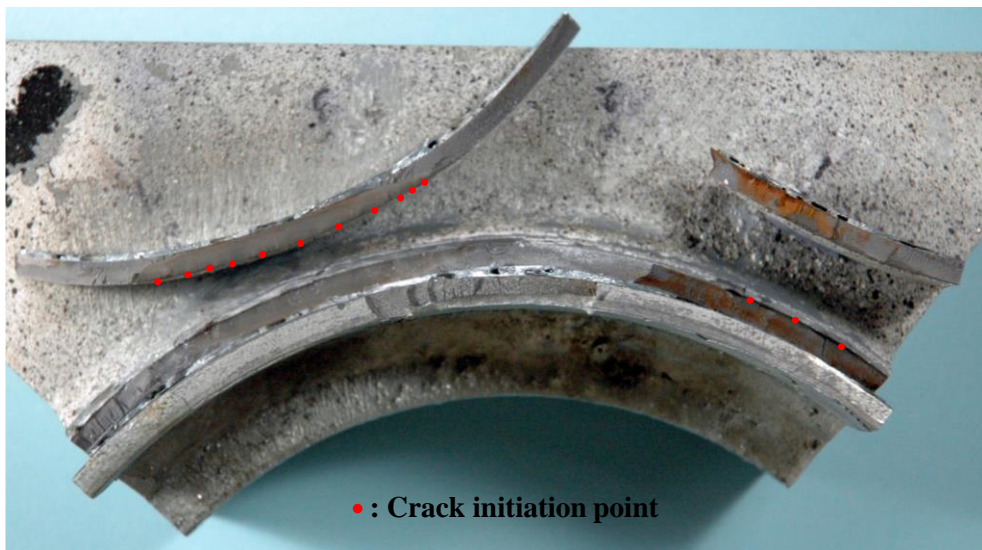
Fatigue fracture surface and identified crack initiation points in Type III-4 Arm
